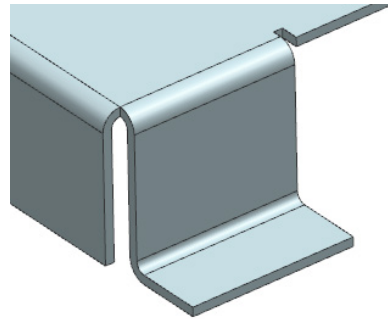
Flanges with the Bend/Face Chain corner relief
